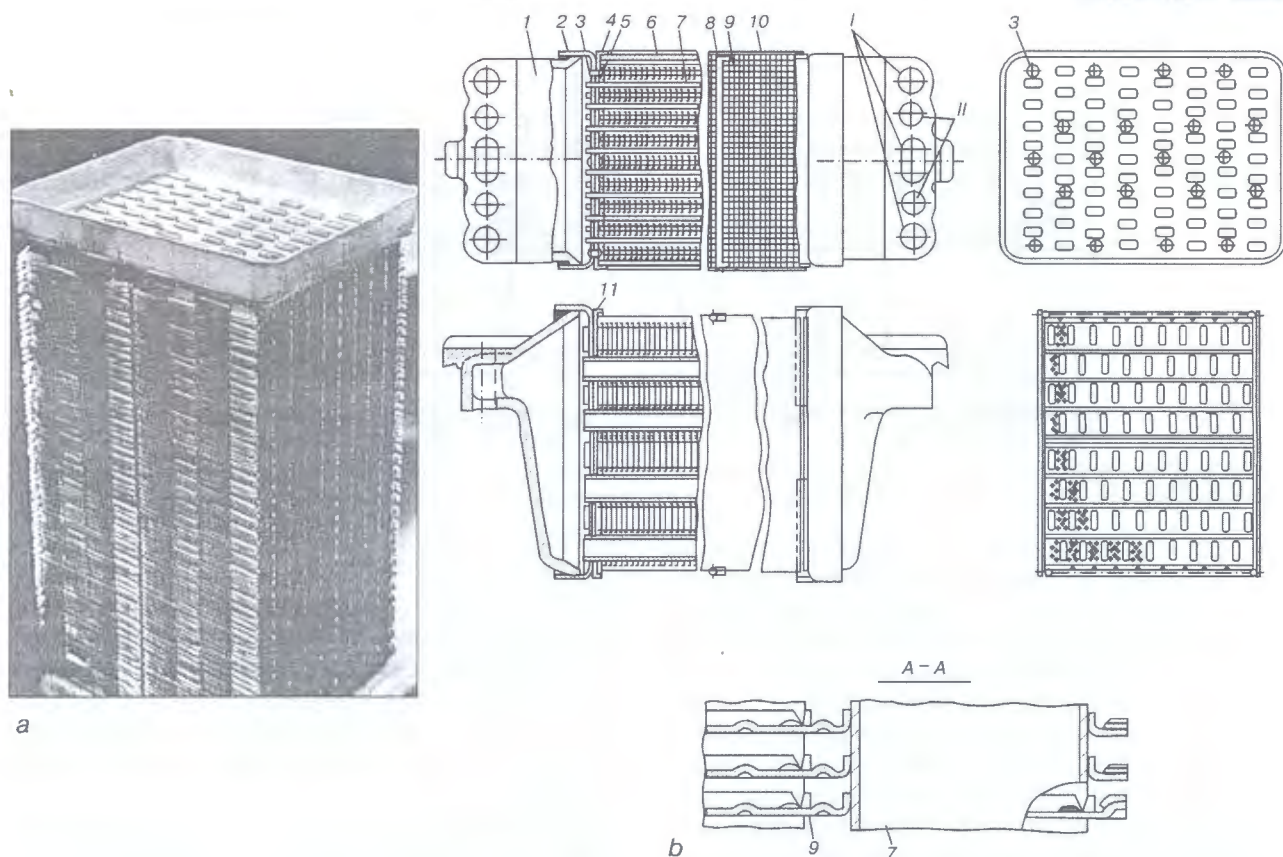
Appearance (a) and scheme of water radiator section (b): 1 — collector; 2 — tubular box; 3 — rivet; 4 — reinforcing plate; 5 — end plate; 6 — strip; 7 — cooling tube; 8 — rod; 9 — cooling plate; 10 — side shield; 11 — rim; I, II — holes, respectively, for water flowing and fastening of section pins to collector of a cooling chamber
